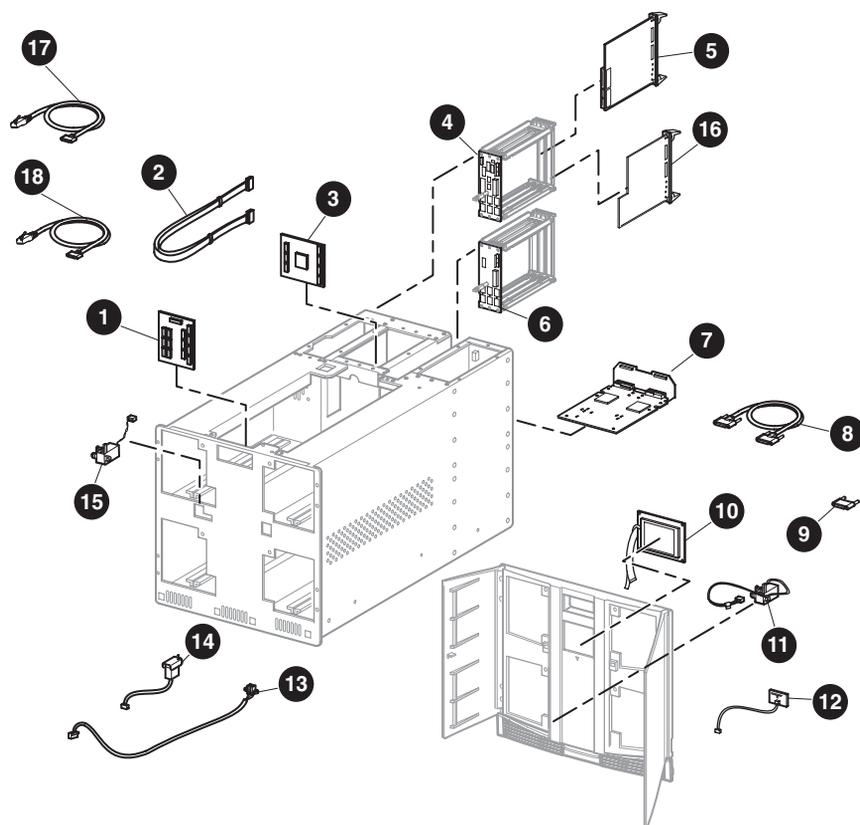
Mechanical spare parts exploded view (two-drive 5U models)
